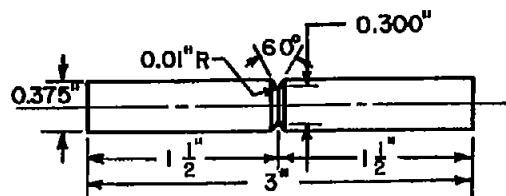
SPECIMENS FOR ROTATING-BEAM
